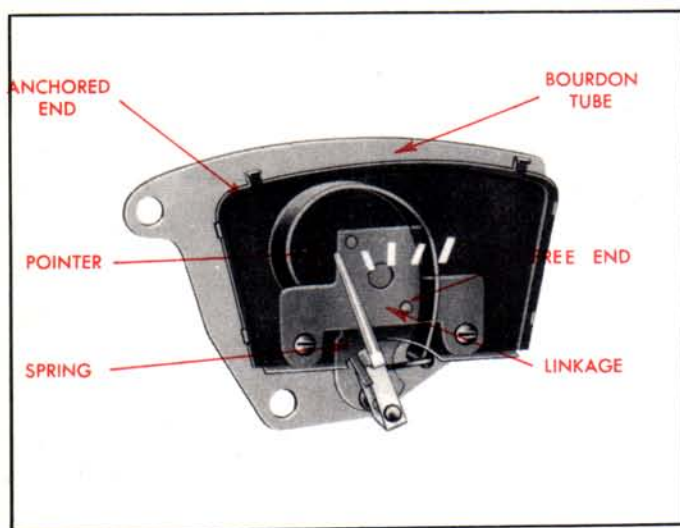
BOURDON TYPE OIL PRESSURE GAUGE. This type gauge is connected by a tube to the oil line and the oil pressure causes the Bourdon tube in the gauge to straighten. The straightening of the tube moves the pointer.
